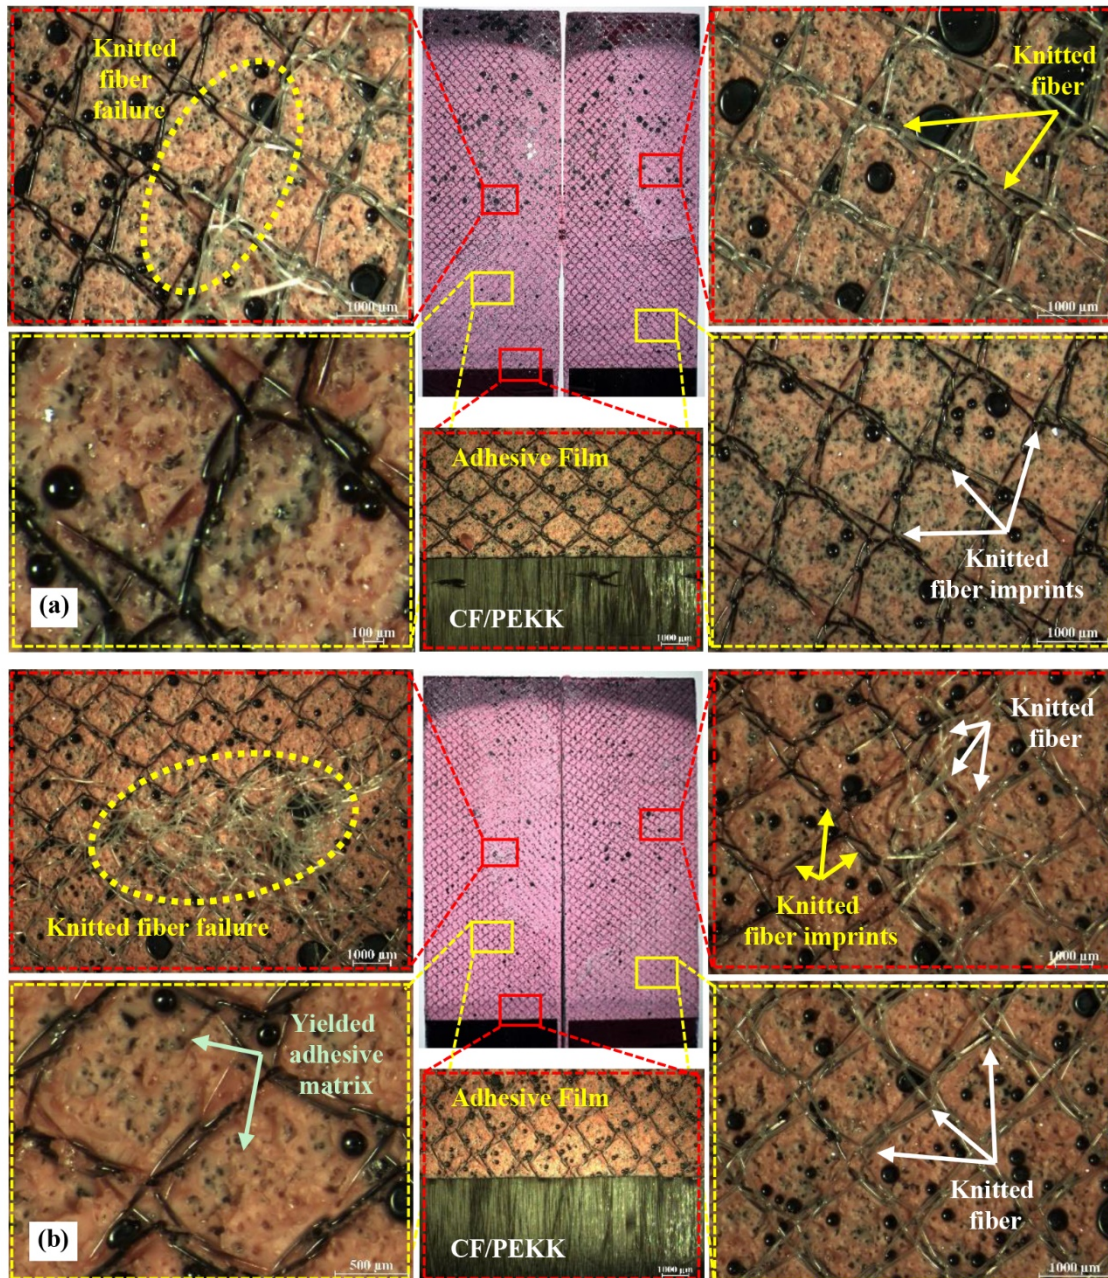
Fractographic failure analysis of conditioned ABJs using stereo microscopy (a) RT, (b) HT.
